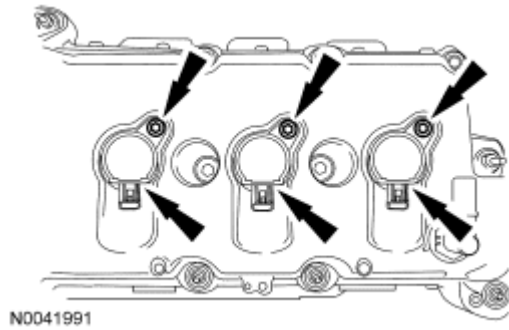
Locating LH Coil-On-Plug Assemblies And Bolts
